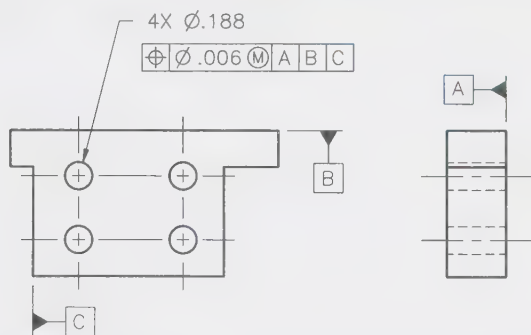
Three datum surfaces may be used to establish a datum reference frame.
